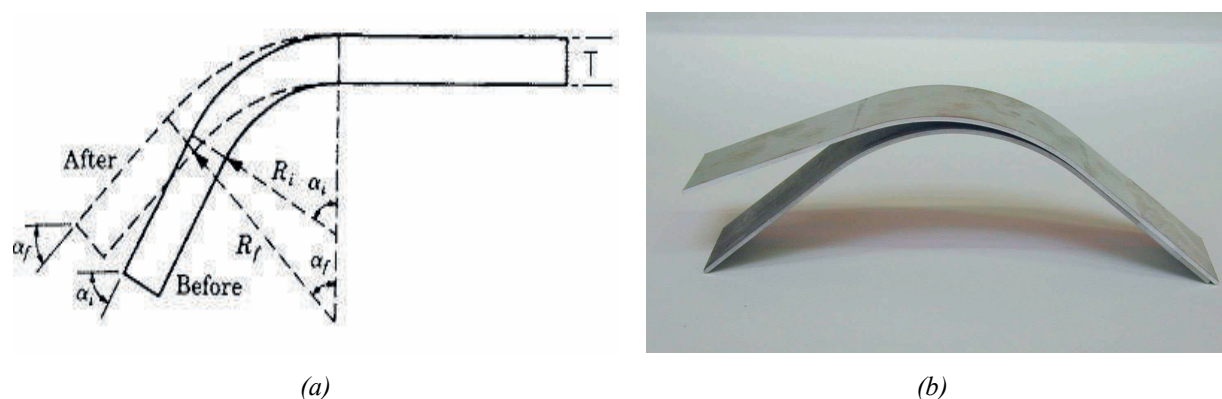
Springback in sheetmetal forming process [9, 10].
